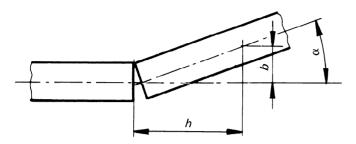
Contact fault in butt welding as a result of deformation of machine
